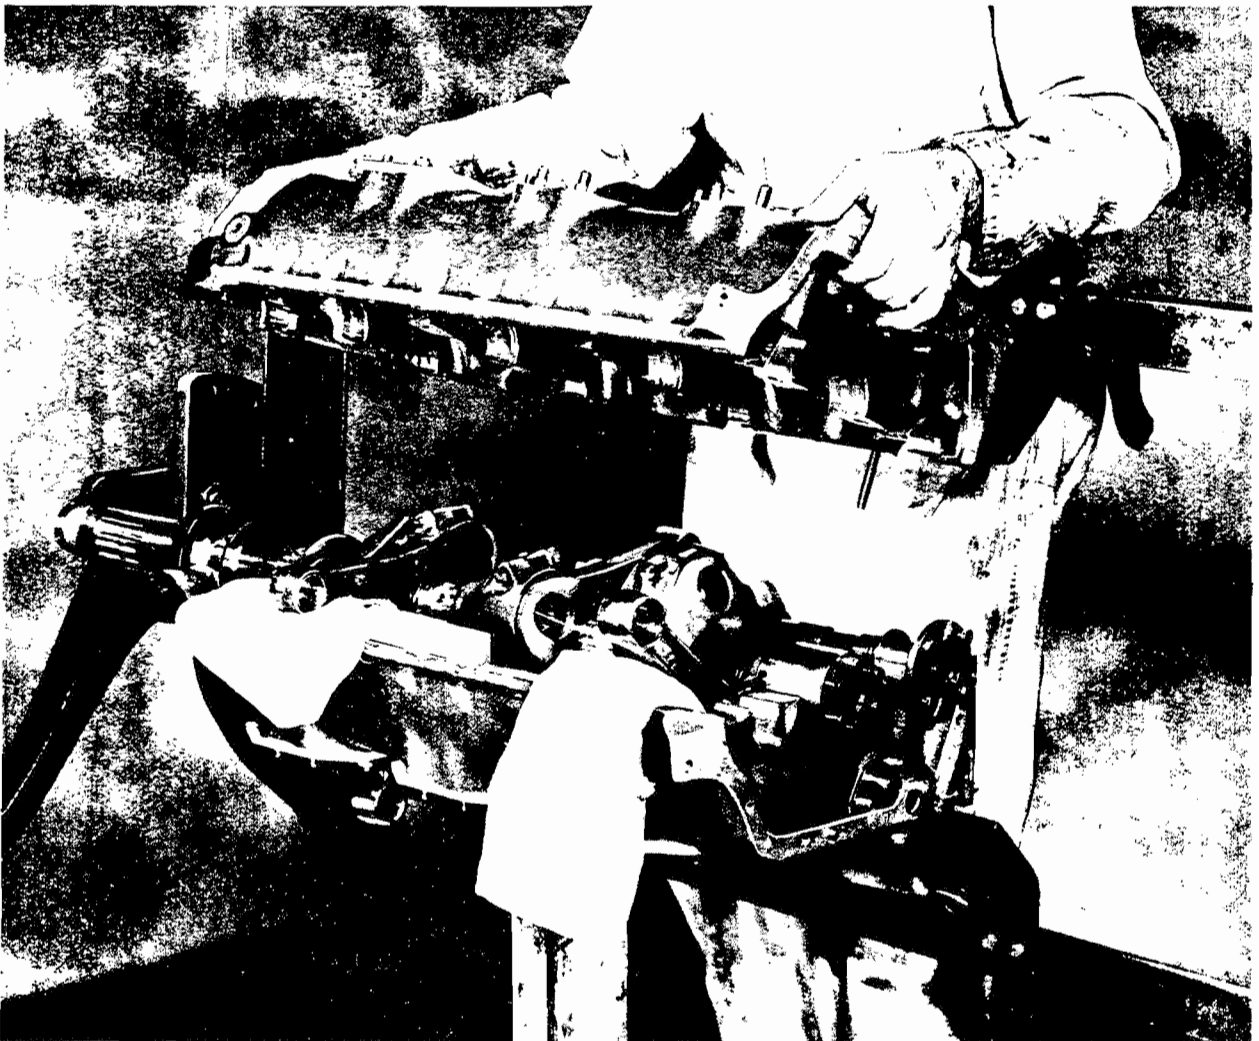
REMOVING CRANKCASE 1, 3, 5 SIDE.
